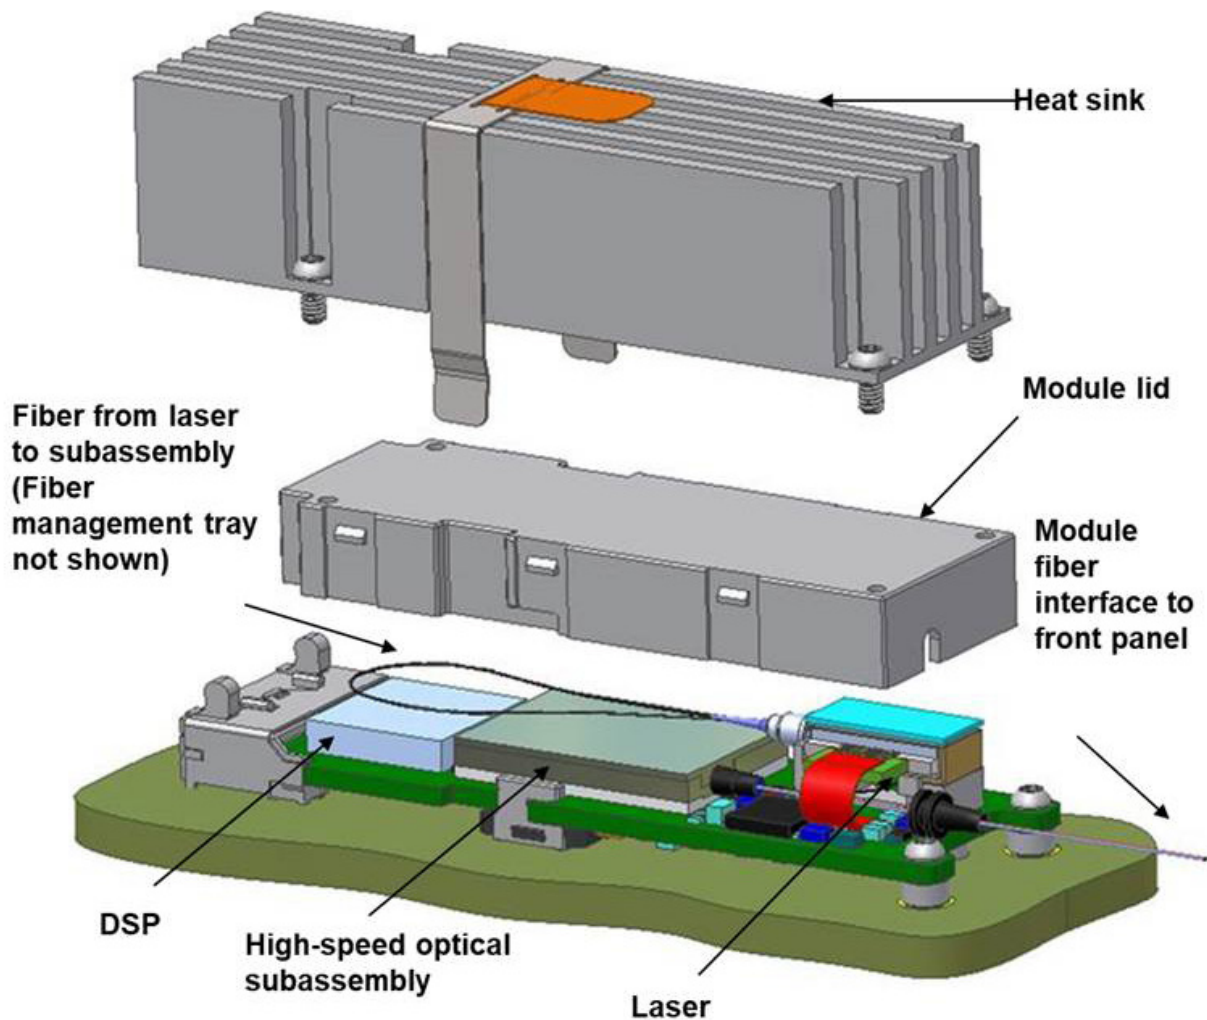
EXAMPLE MODULE DESIGN USING FULLY INTEGRATED OPTICAL SUBASSEMBLY
